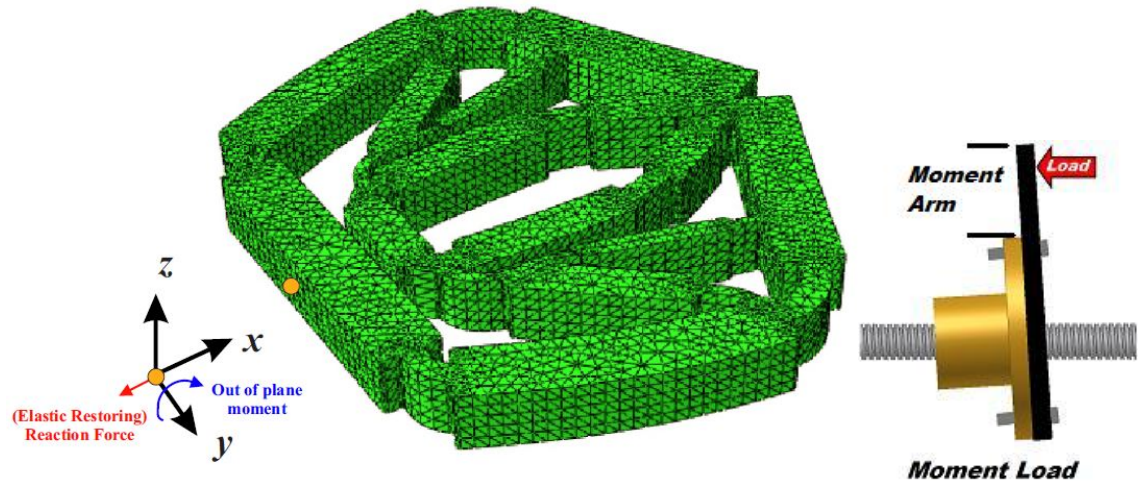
Engineering issues caused by offset of the linear actuation platform.
